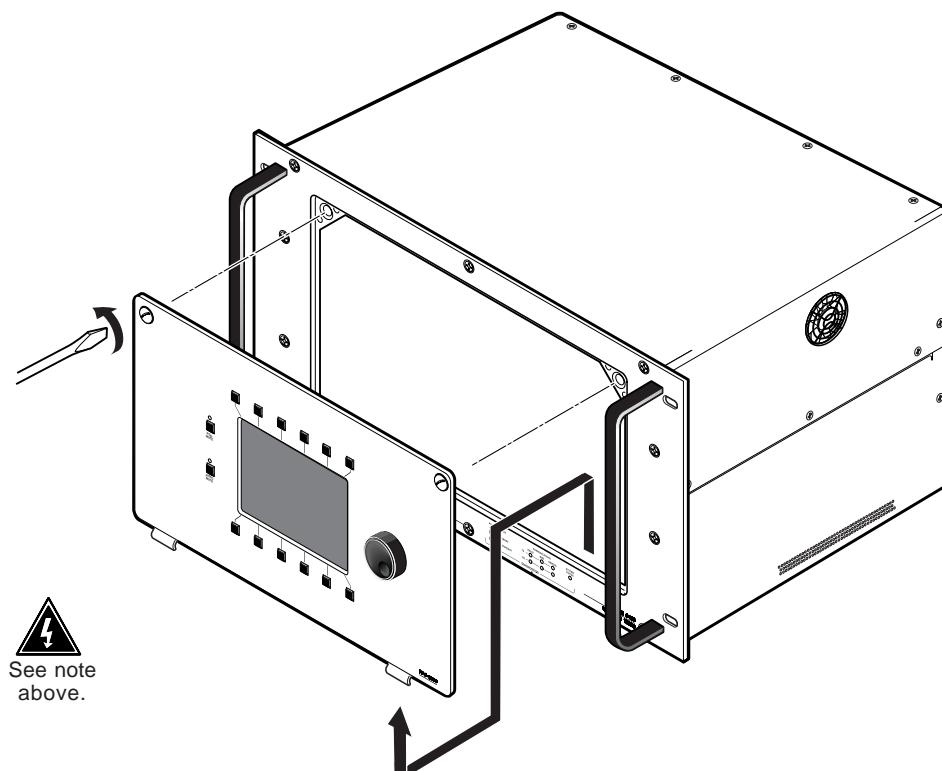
B Removing the access panel (blank or FPC 1000)
